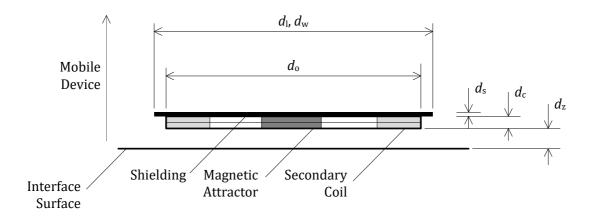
Secondary Coil and Shielding assembly of Power Receiver example 2
